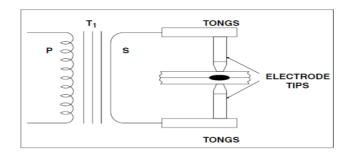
Resistance Spot Welding Machine With Work
